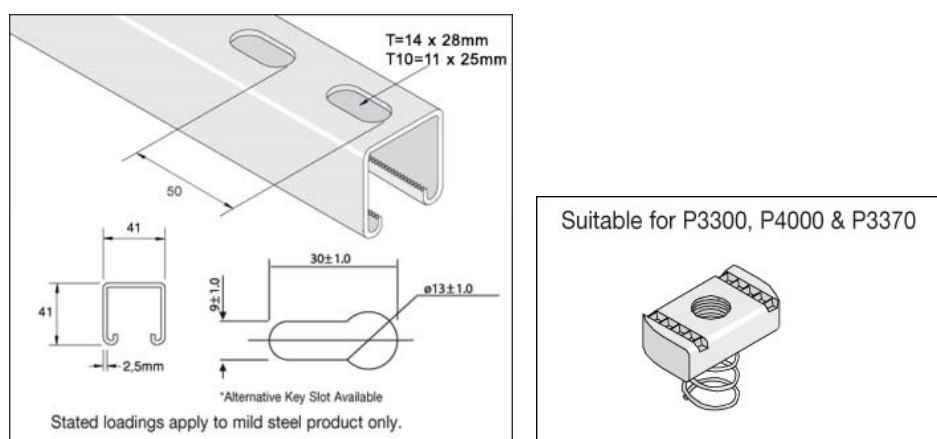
Unistrut racking – the beams are screwed through the holes to the roof joists. The spring mounted washer to which the panels bolt sits in the groove.
